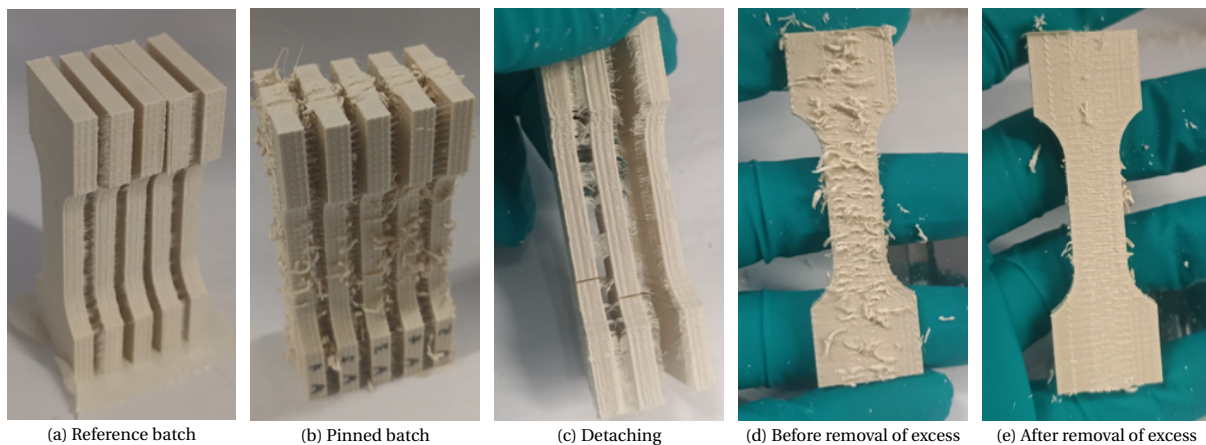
Printing and post-processing of test specimens. (a) shows a batch of reference specimens without pins. (b) shows a batch of pinned specimens with visible signs of over-extrusion. (c) illustrates specimen detachment, where interlayer cracking can occur. (d) shows a pinned specimen before removing the over-extruded material. (e) displays the same specimen after trimming.
